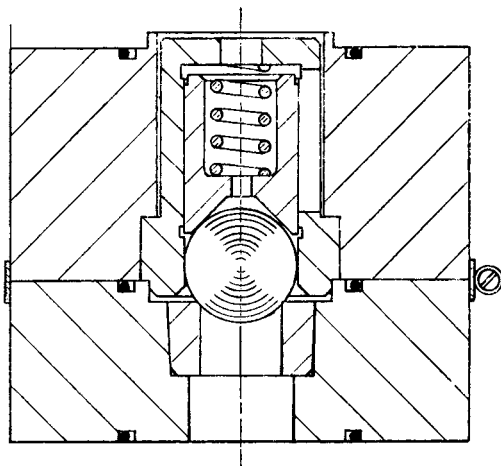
Reciprocating pump ball valve. (Ingersoll-Rand Company.)
